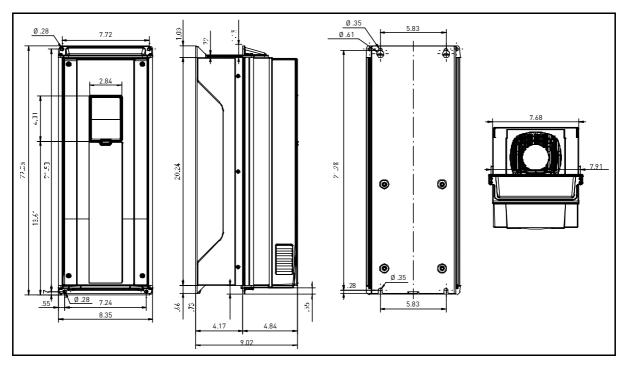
SmartVFD HVAC dimensions, MR6, flush mount
